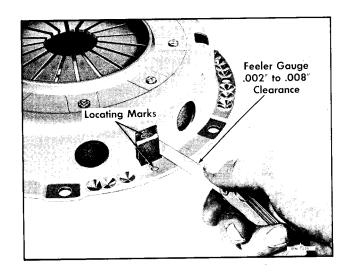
Clutch Cover-To-Plate Alignment Marks and Driving Lug Clearance Check
